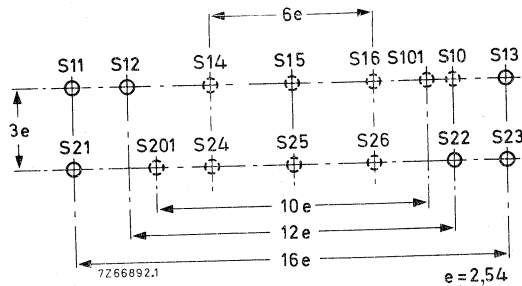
Hole pattern of the printed-wiring board for a tandem potentiometer (viewed on component side).
